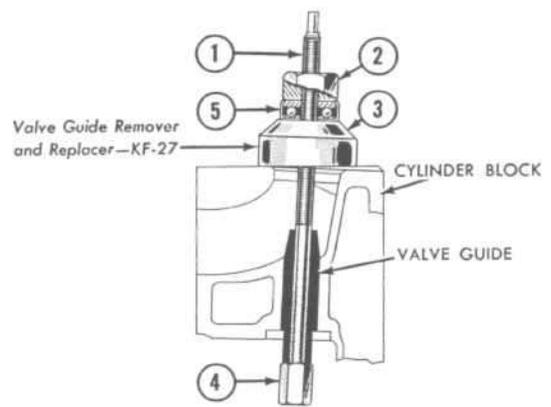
REMOVING VALVE GUIDE FROM CYLINDER BLOCK
